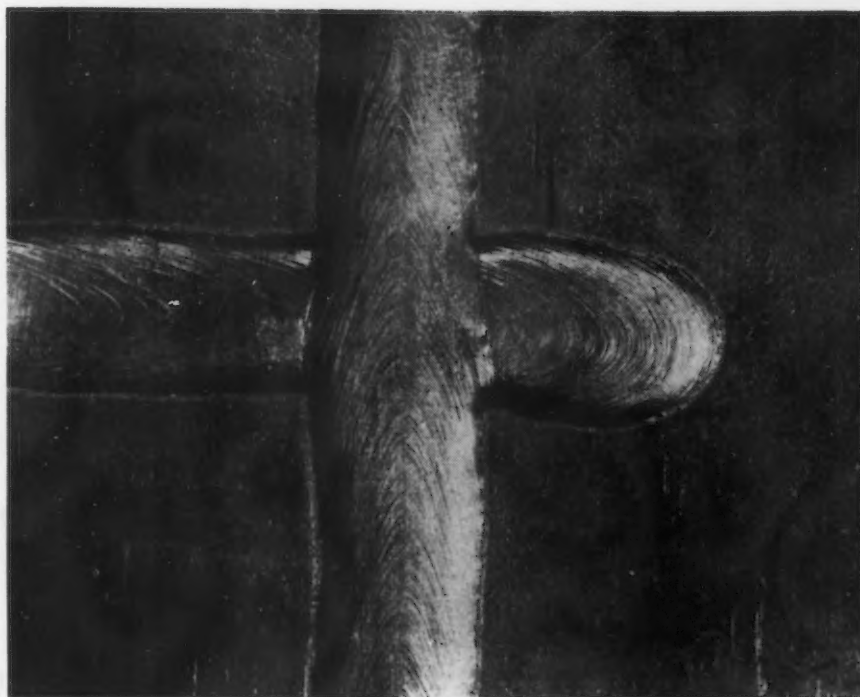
Close-up of a completed automatic weld. This is the intersection of longitudinal and girth welds.
